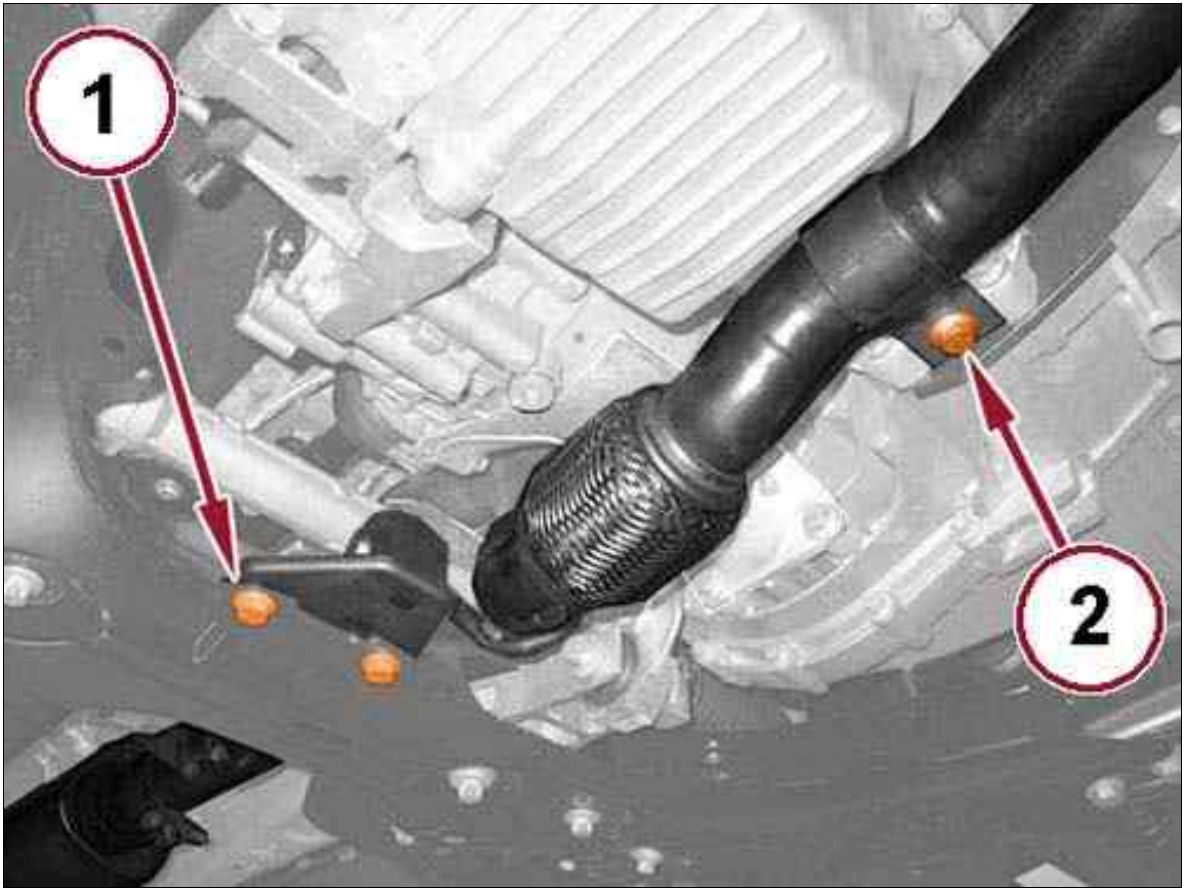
Rear Exhaust Hanger Bracket Bolts & Exhaust Clamp Nut
